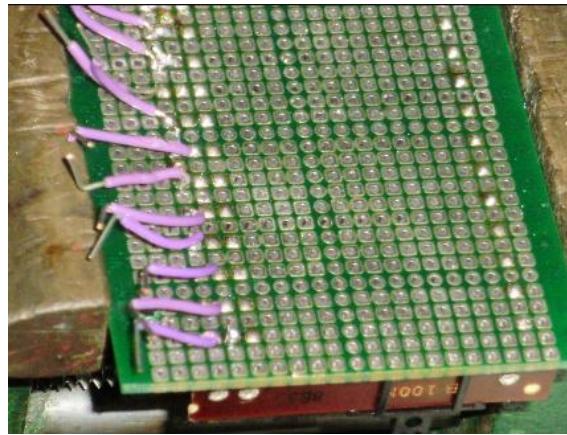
Bottom view of the perf board with the equalizer slide potentiometers
